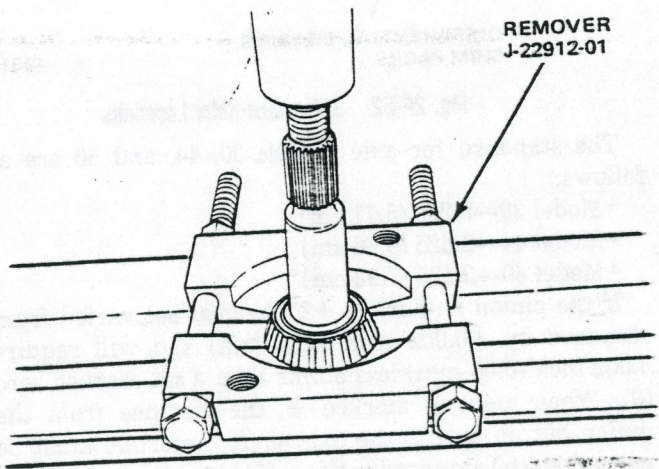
F-50 Pinion Rear Bearing Removal—Model 60 Axle
